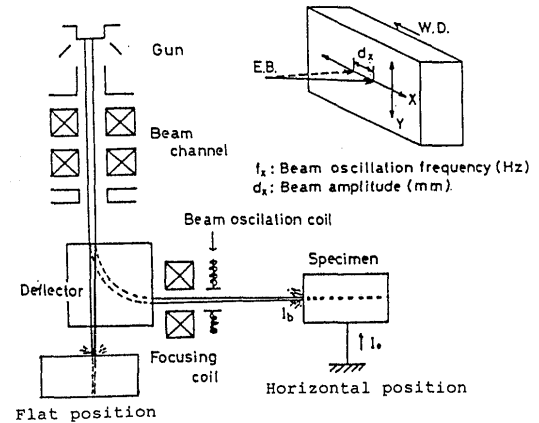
Schematic diagram of flat and horizontal position welding method.
